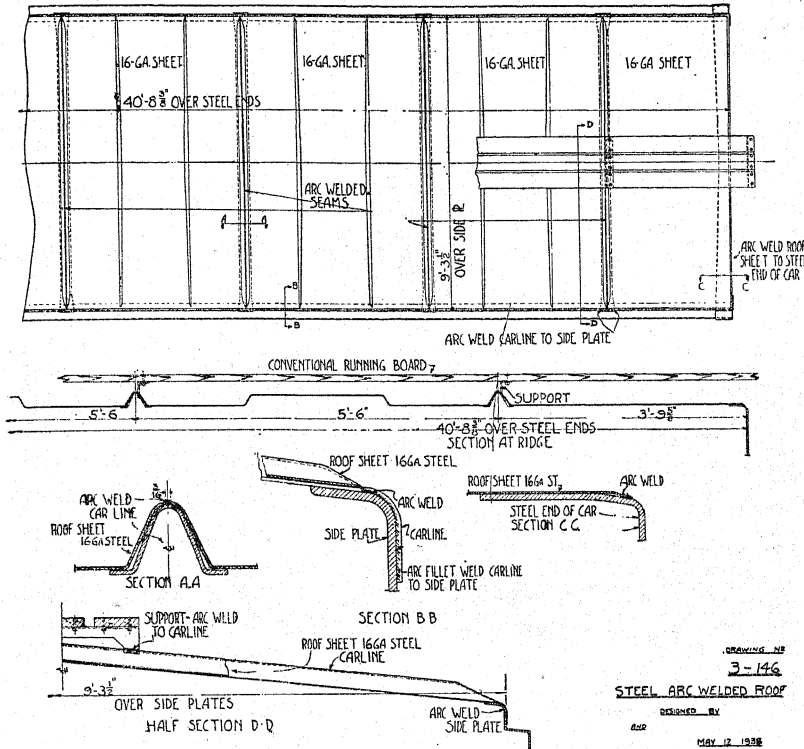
New arc welded roof design applied to 40-foot box car.
